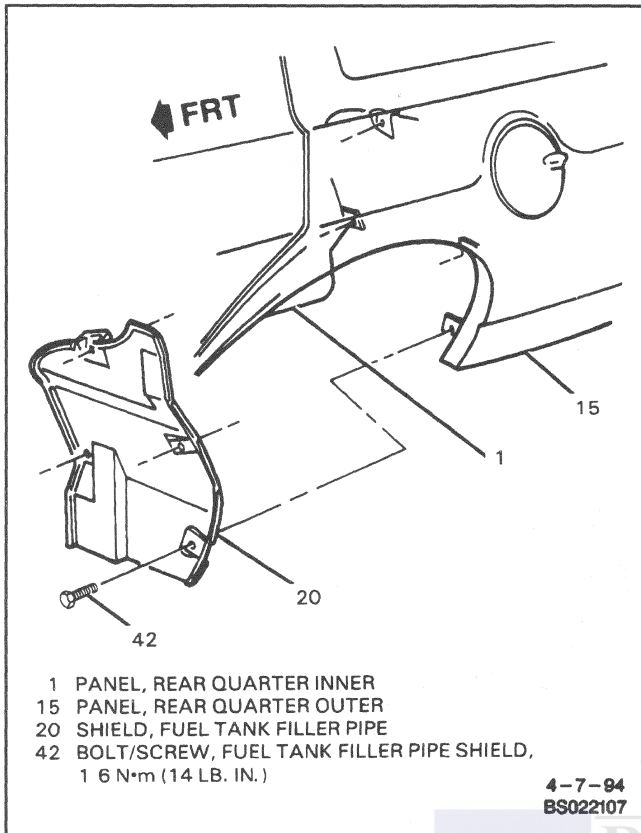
Fuel Tank Filler Pipe Shield - (Wagon)
